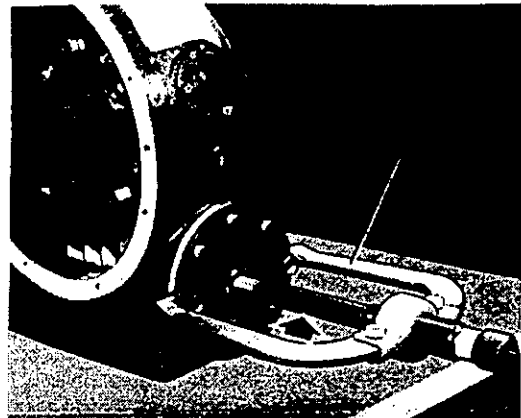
Removing wormshaft outer taper roller bearing outer race
